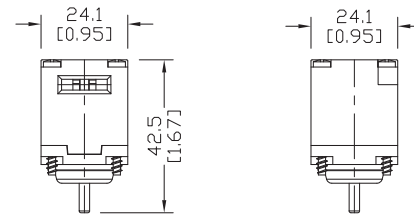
Fully turnable 360° head - SP2K120, SDM2K120 models
